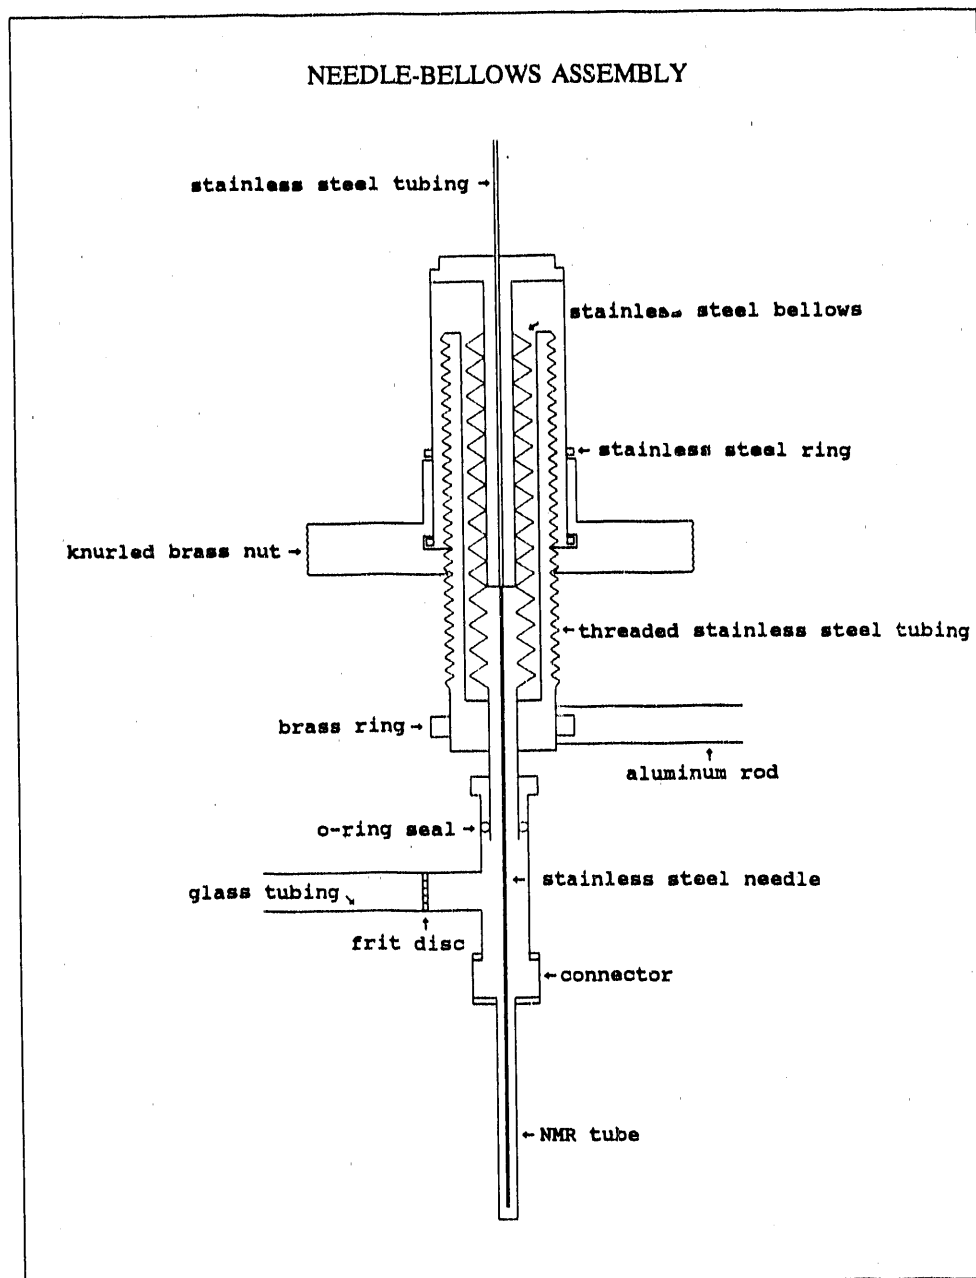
A detailed drawing of a needle-bellows assembly. Each part of the device is labeled as indicated in the figure
